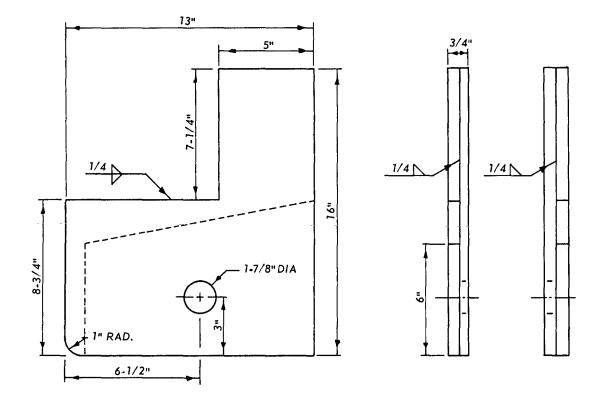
Detail of the modifications made in the prototype truss connector design.
